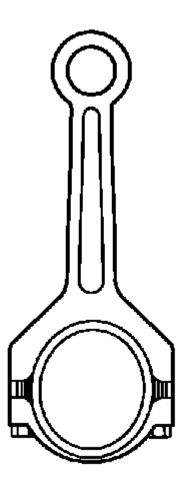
View Of Connecting Rod Courtesy of GENERAL MOTORS CORP.
